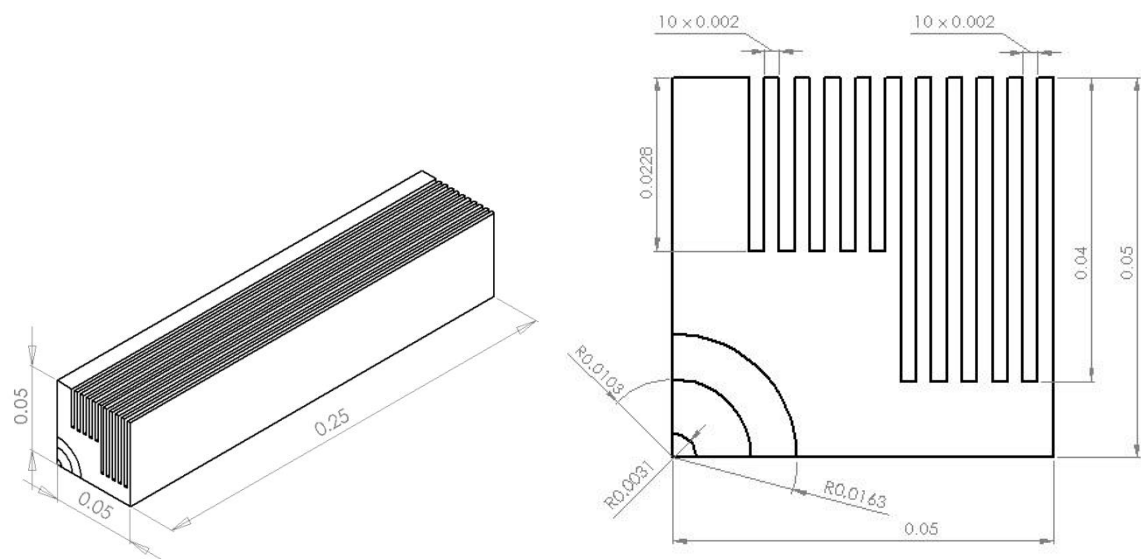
Dimensions (in m) of one quadrant of 10 fin housing
